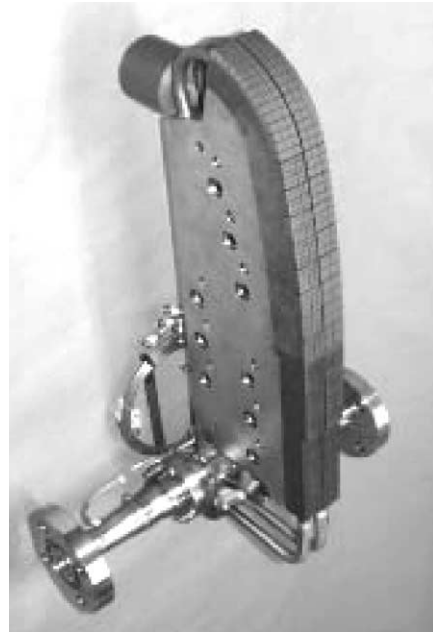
EU divertor prototype with CfC monoblocks and W macro-brush armour.
